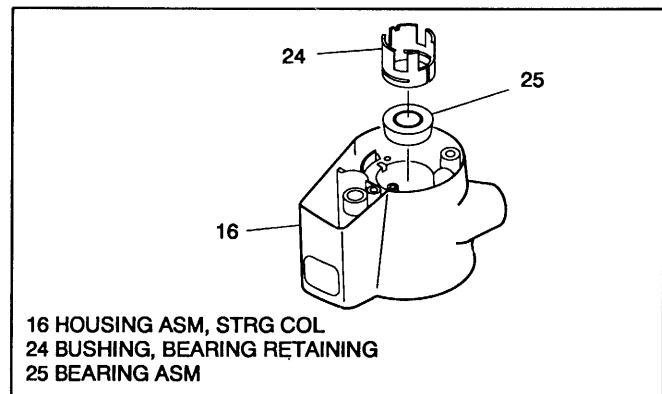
Removing Bearing Retaining Bushing and Bearing Assembly
